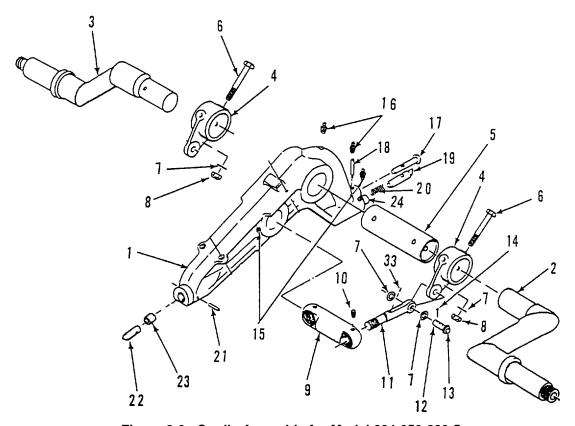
Cradle Assembly for Model 204-050-200-5
